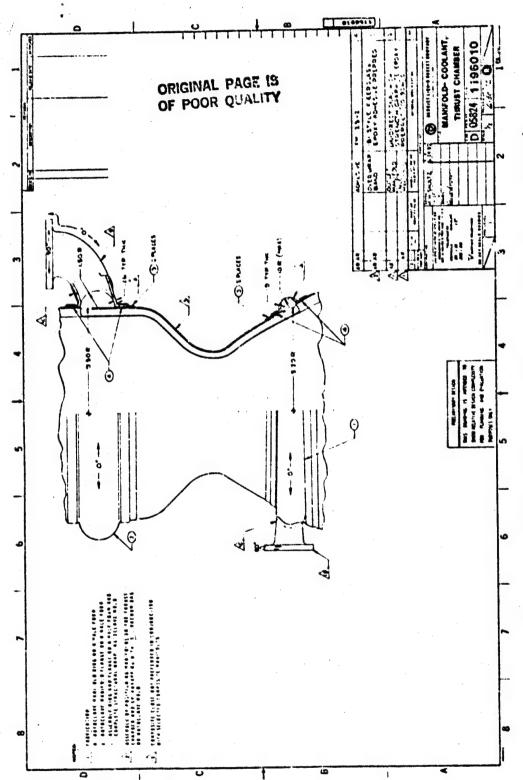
Manifold - Coolant, Thrust Chamber (ALRC Drawing No. 1196010)
